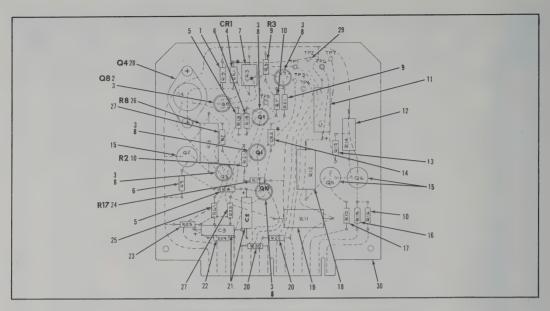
Circuit Card Assembly, Keyer, Control-Transfer, 1A2
